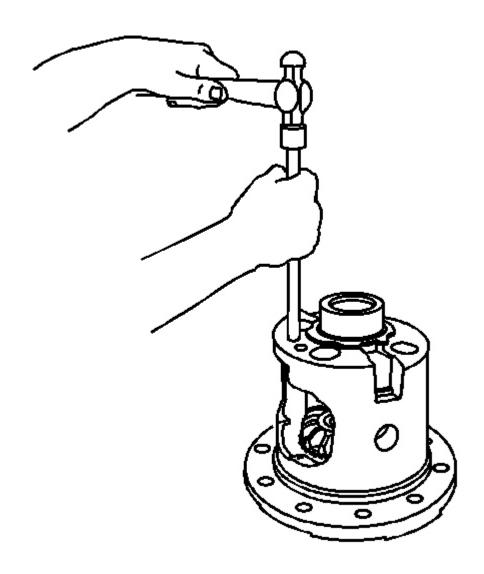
Installing Governor Bushing Using Hammer & Brass Drift Courtesy of GENERAL MOTORS CORP.
